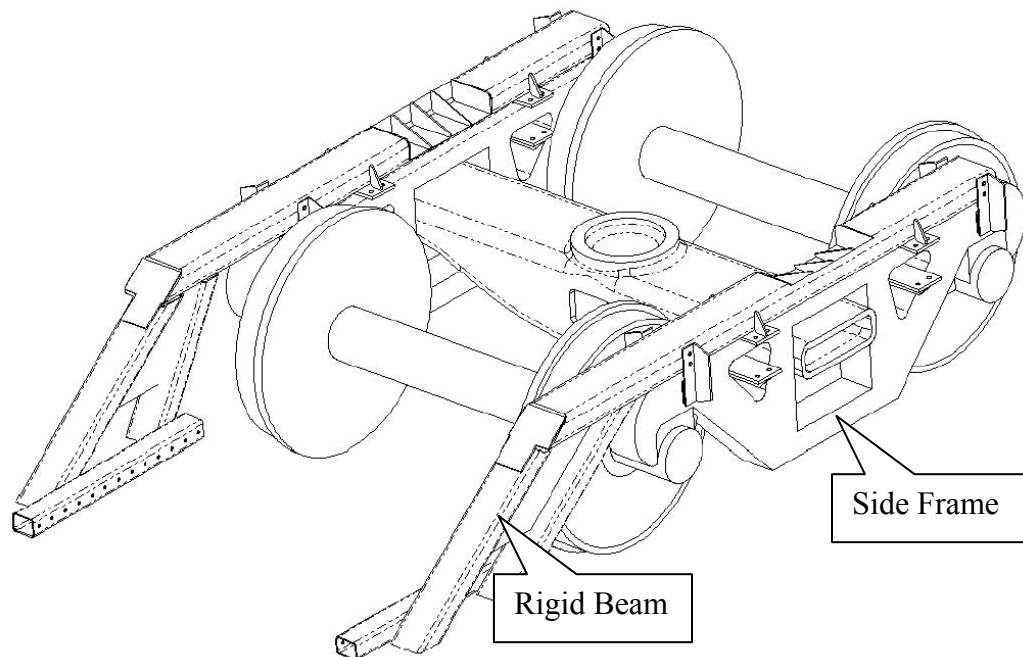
Hopper Car Truck and Rigid Beams Assembly
